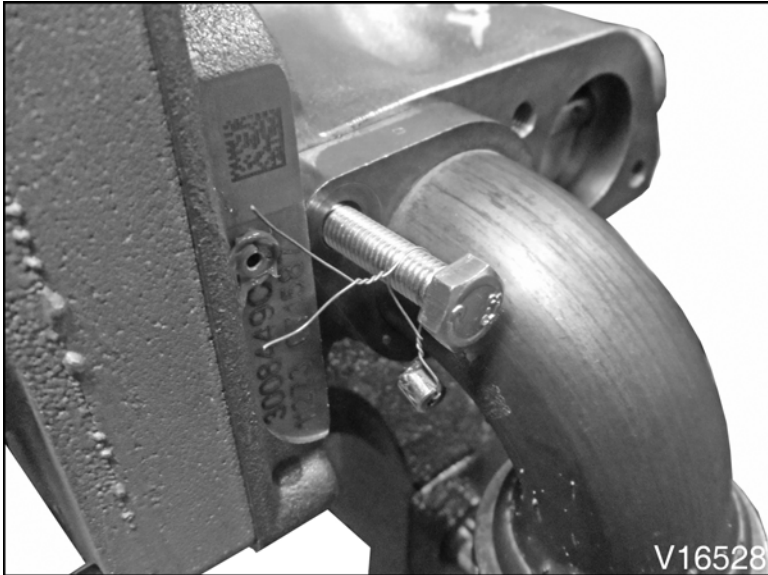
Tether Rivet/Spacer Assembly to Jig Bolt
